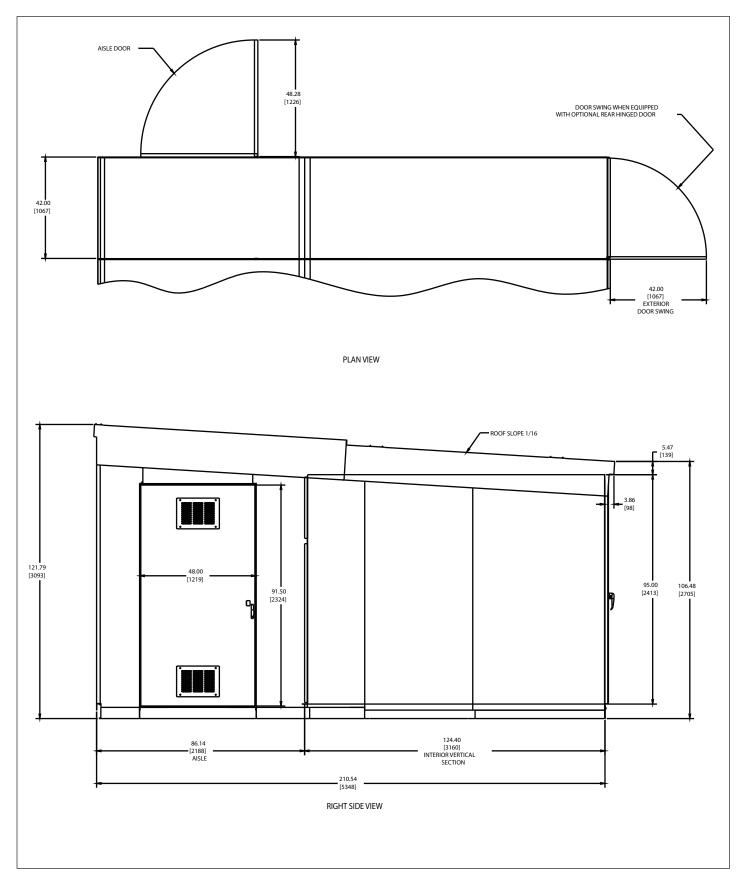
Outdoor Sheltered Aisle Right Side View With Dimensions.
